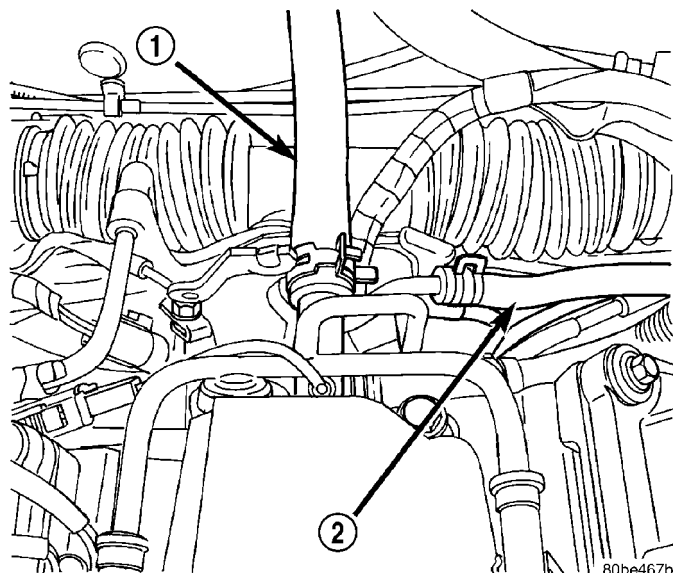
HEATER SUPPLY HOSE CONNECTIONS
